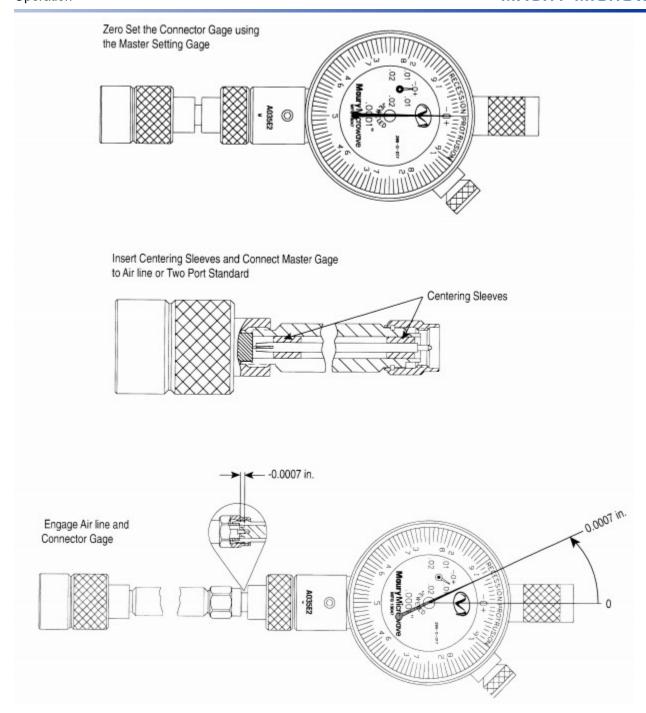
Gaging Beadless Precision 2.4mm Airlines
